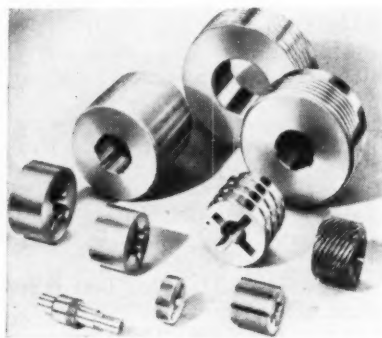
Cylindrical dies for cylindrical-die thread-rolling machines
